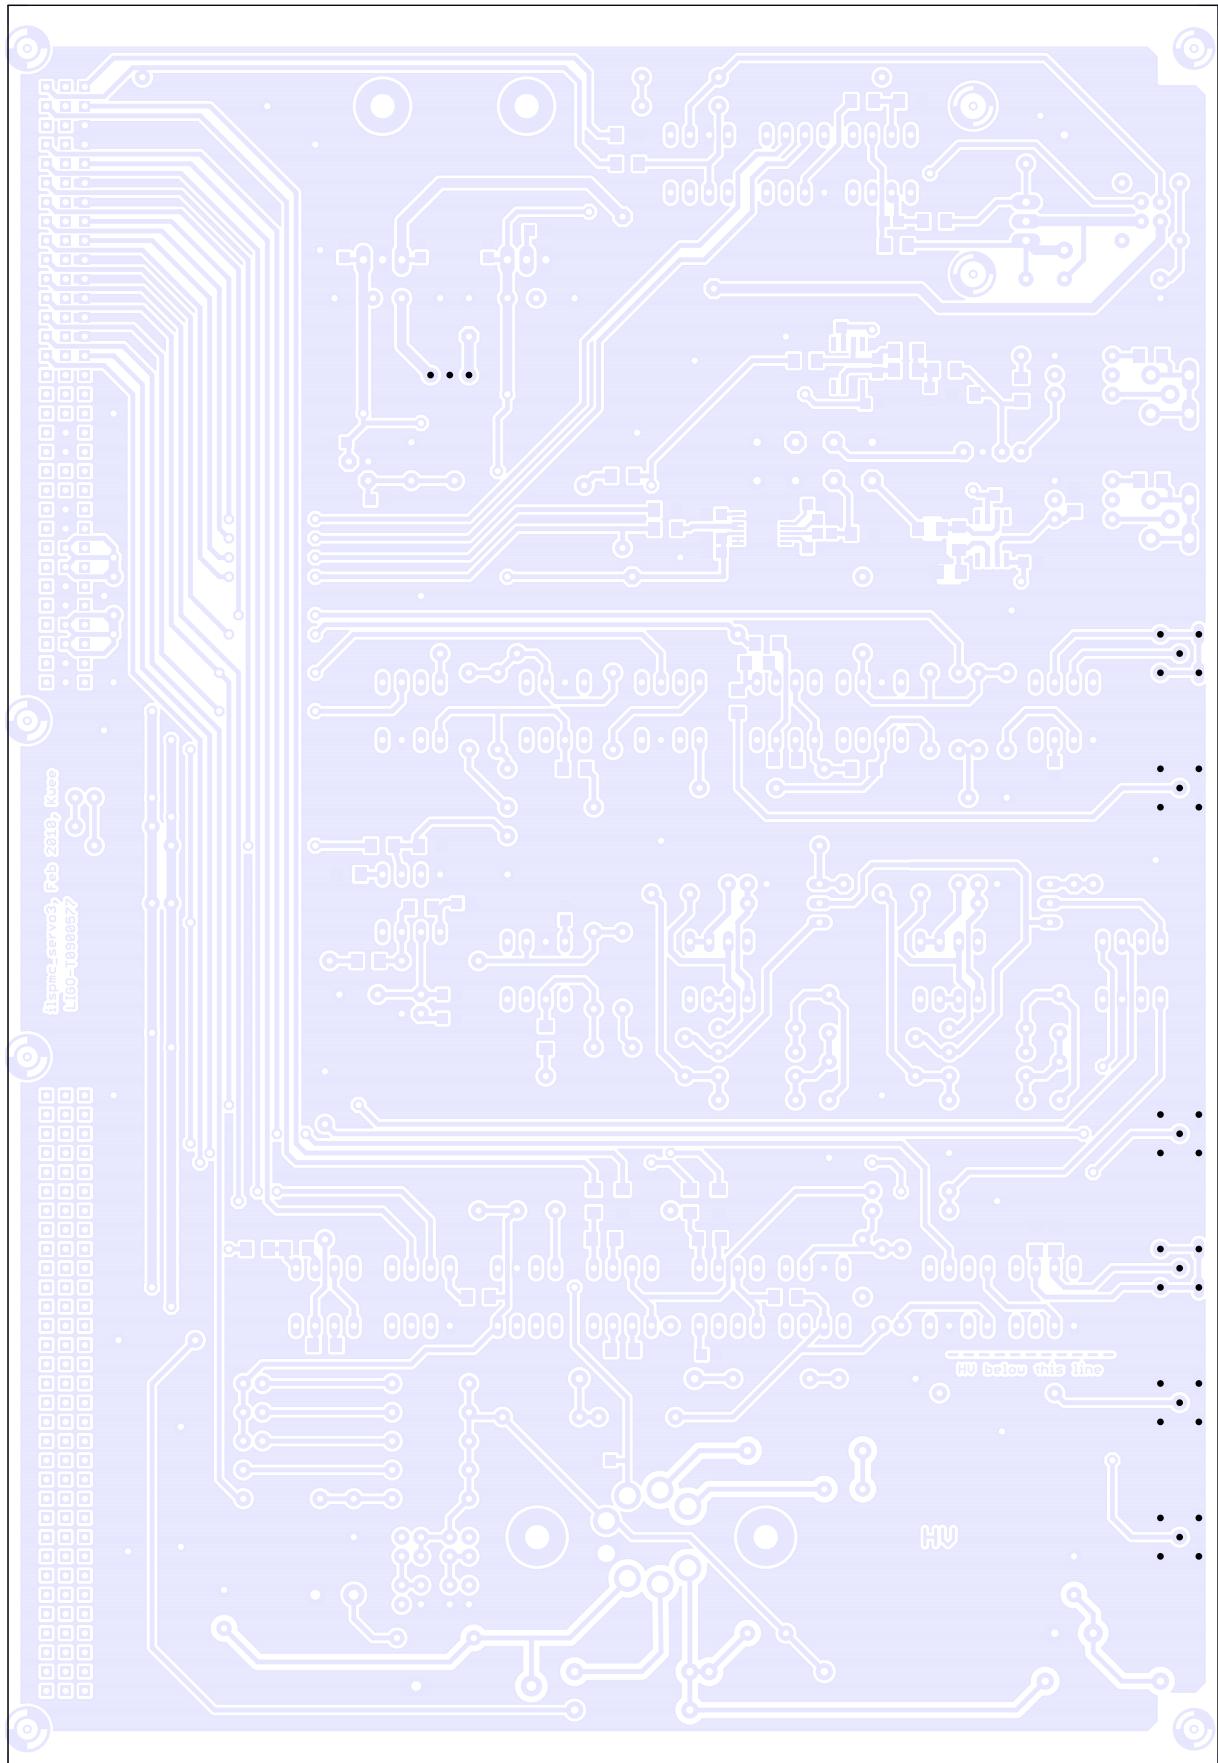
Board bottom view showing drills with 0.9 mm (0.035 in) diameter
